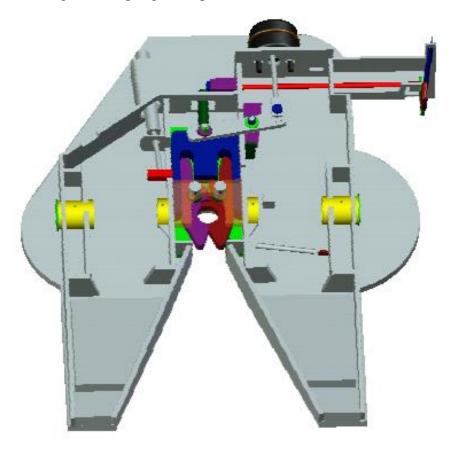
Bottom View of 5th Wheel Locking Jaws With The Jaw Fork Fully Engaged
